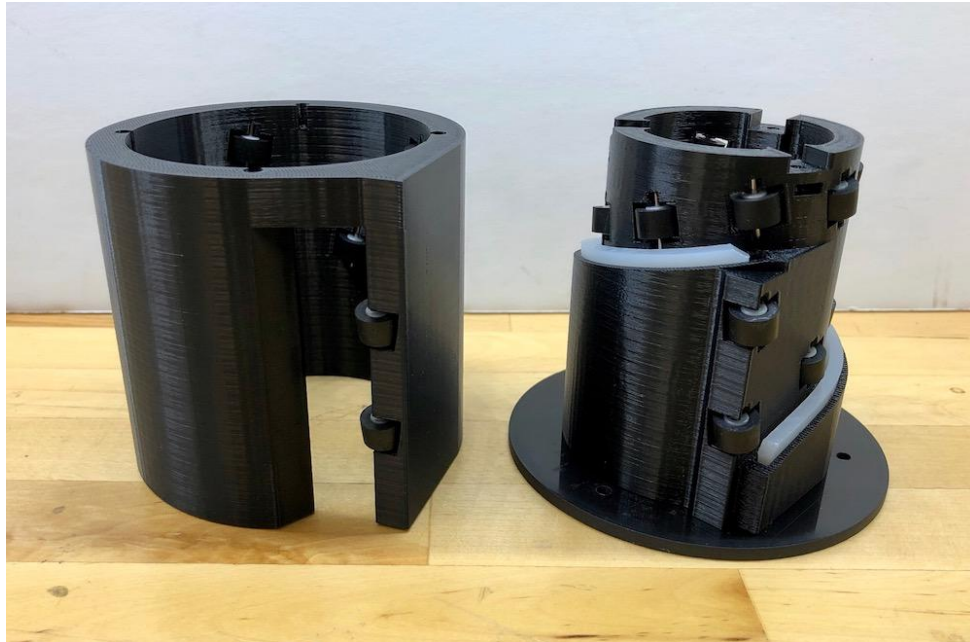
The improved slider, with wear-resistant bearing surfaces.
